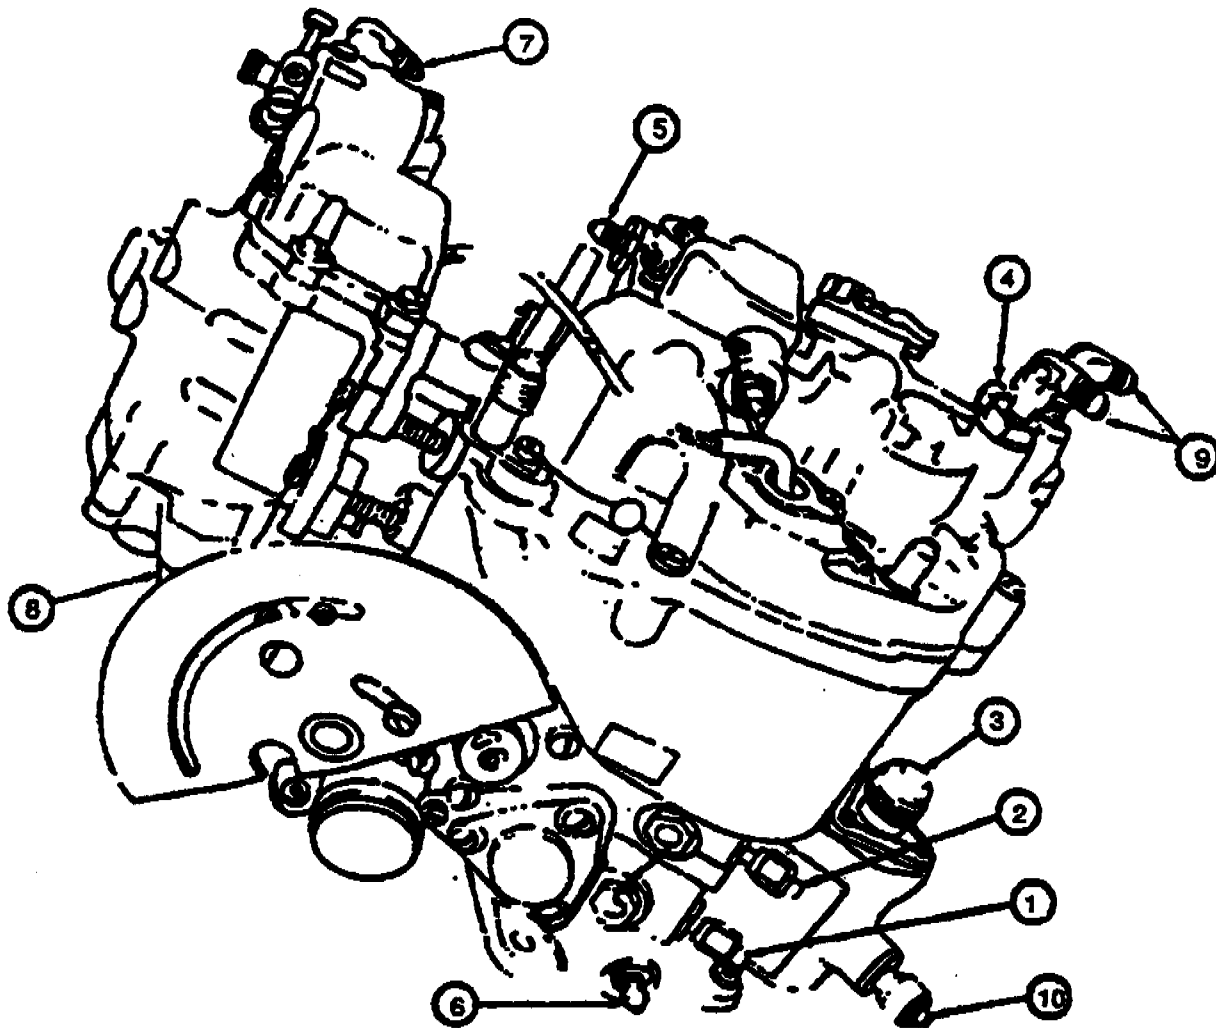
Quadrant Assembly Installed and Trim Locations.
